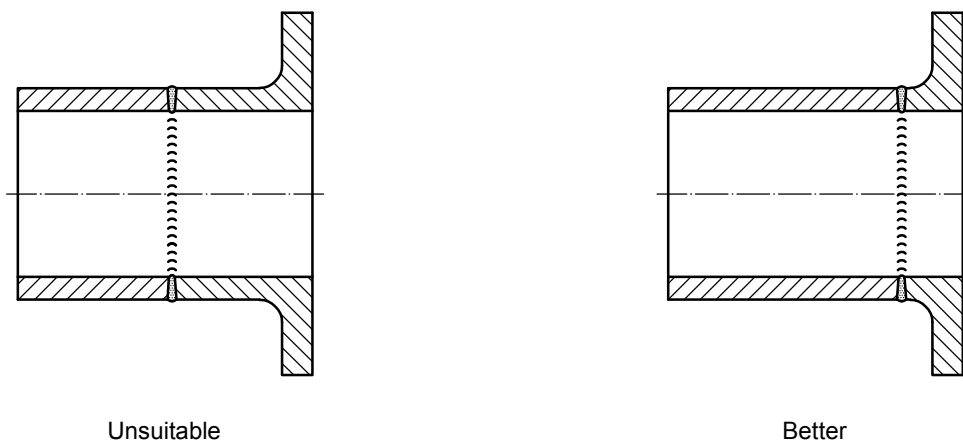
Work-pieces with unsuitable and better positions for radial weld
